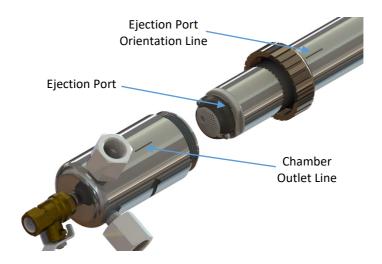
Sensor ejection port is identified by the engraved line on sensor sleeve. This line must be aligned with the engraved outlet line on the chamber during installation.
